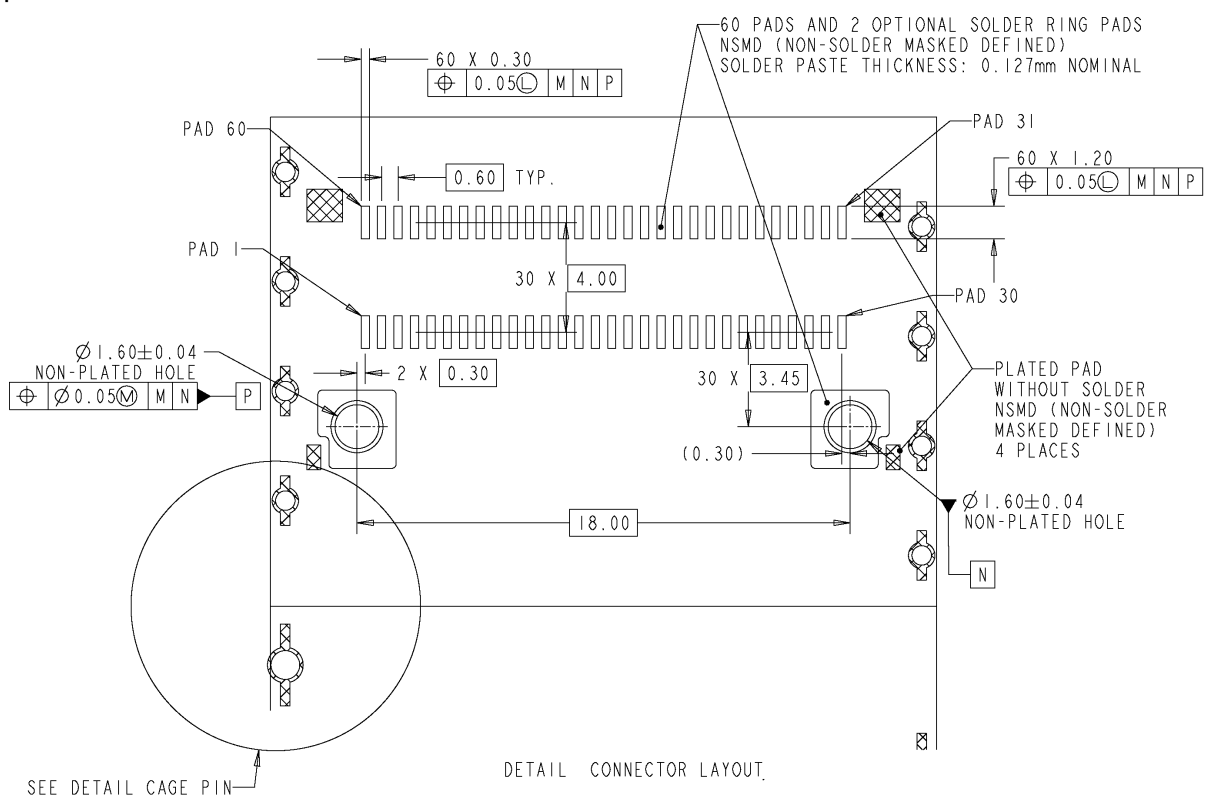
Host PCB layout for OSFP1600 (Detail Connector Layout)
